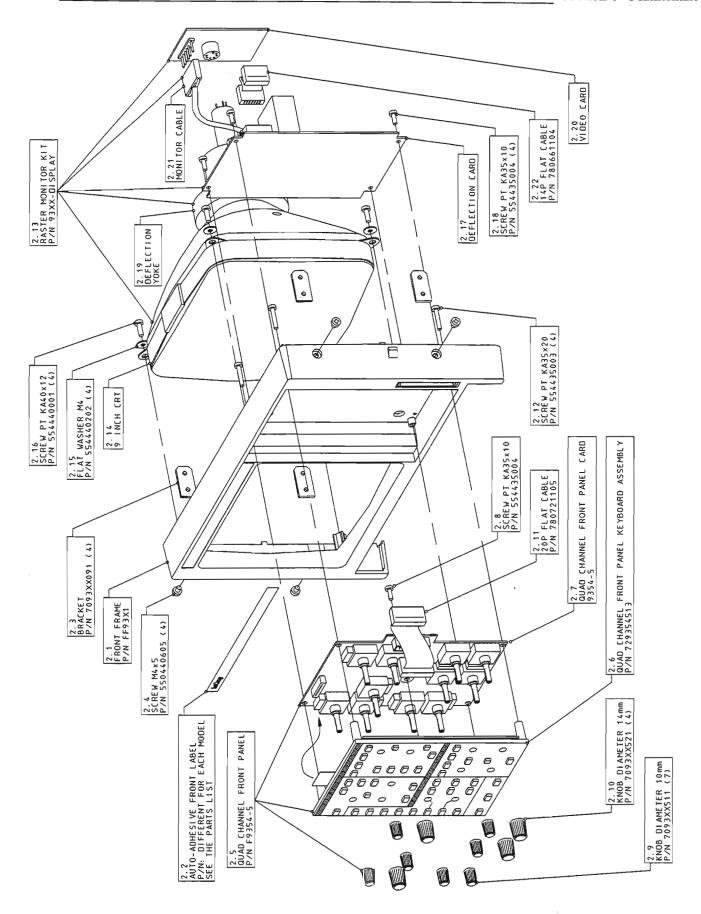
9374/M/L/TM Front Frame Assembly
